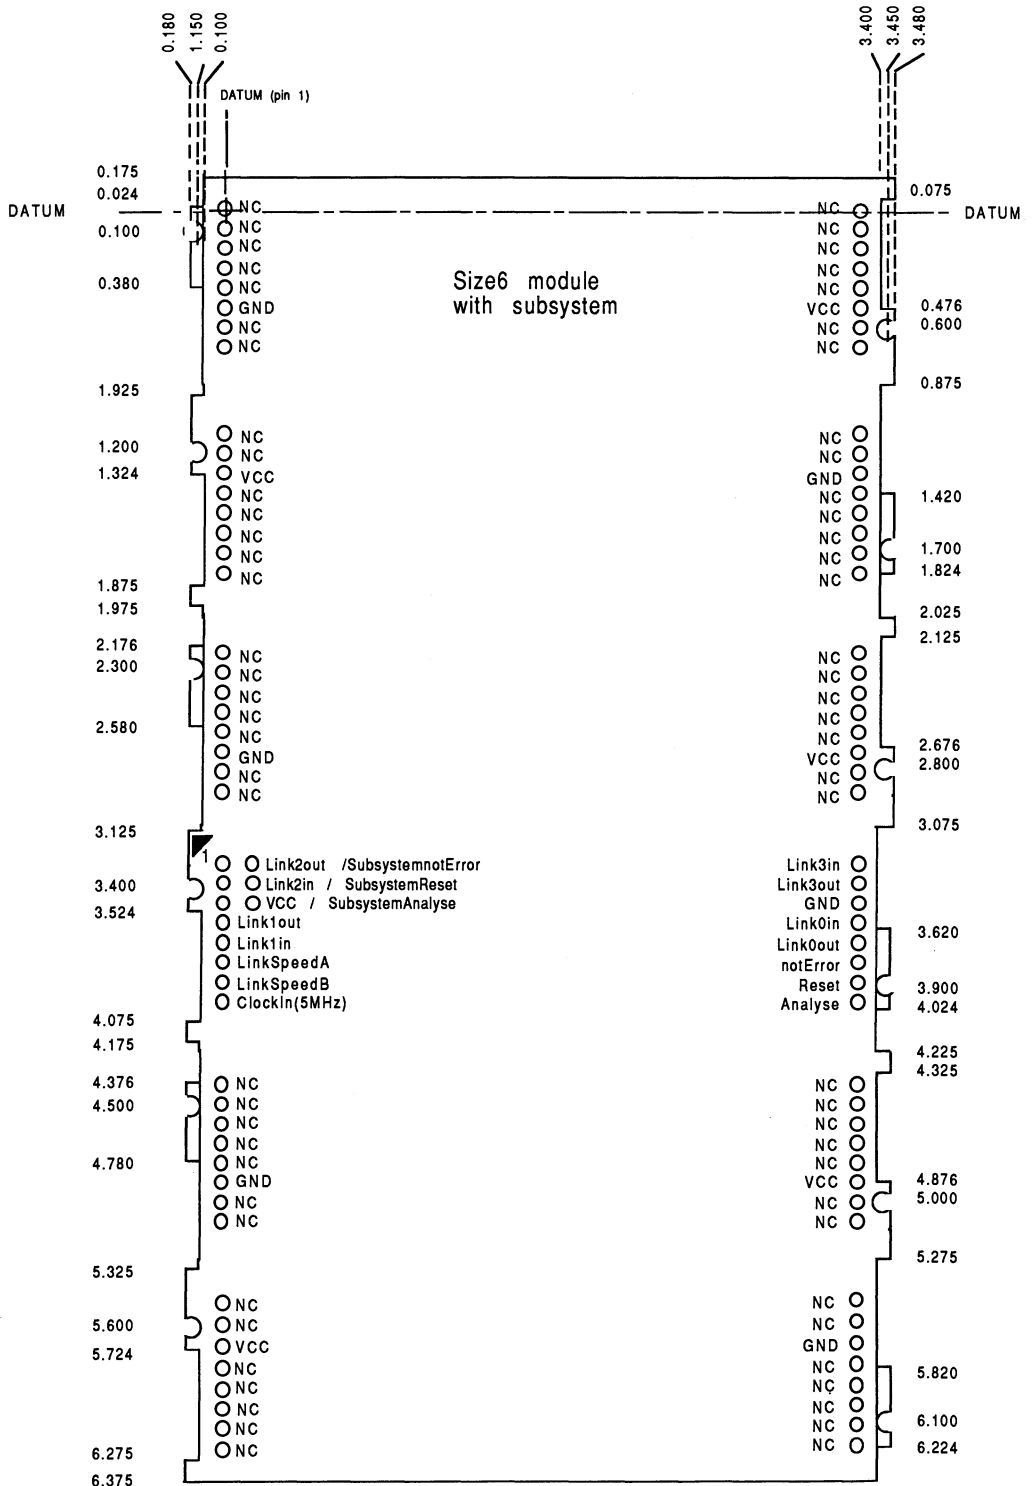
IMS B419 outline drawing (All dimensions in inches)
